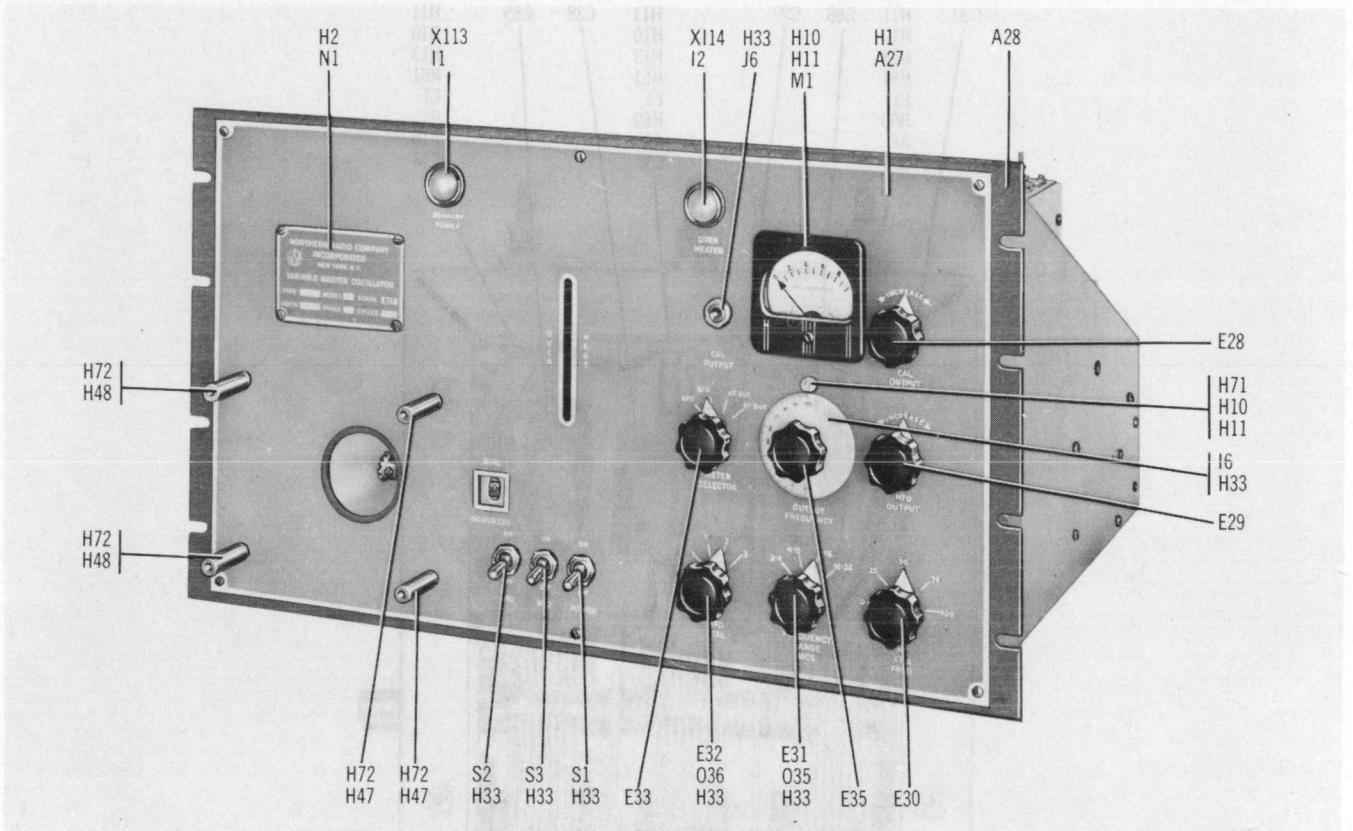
Front Panel and Chassis Assembly (E37), Panel Front View
